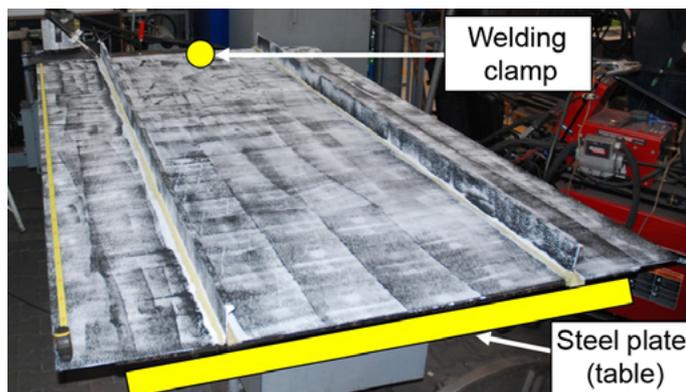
Fastening flat section and first-order bracings during welding
